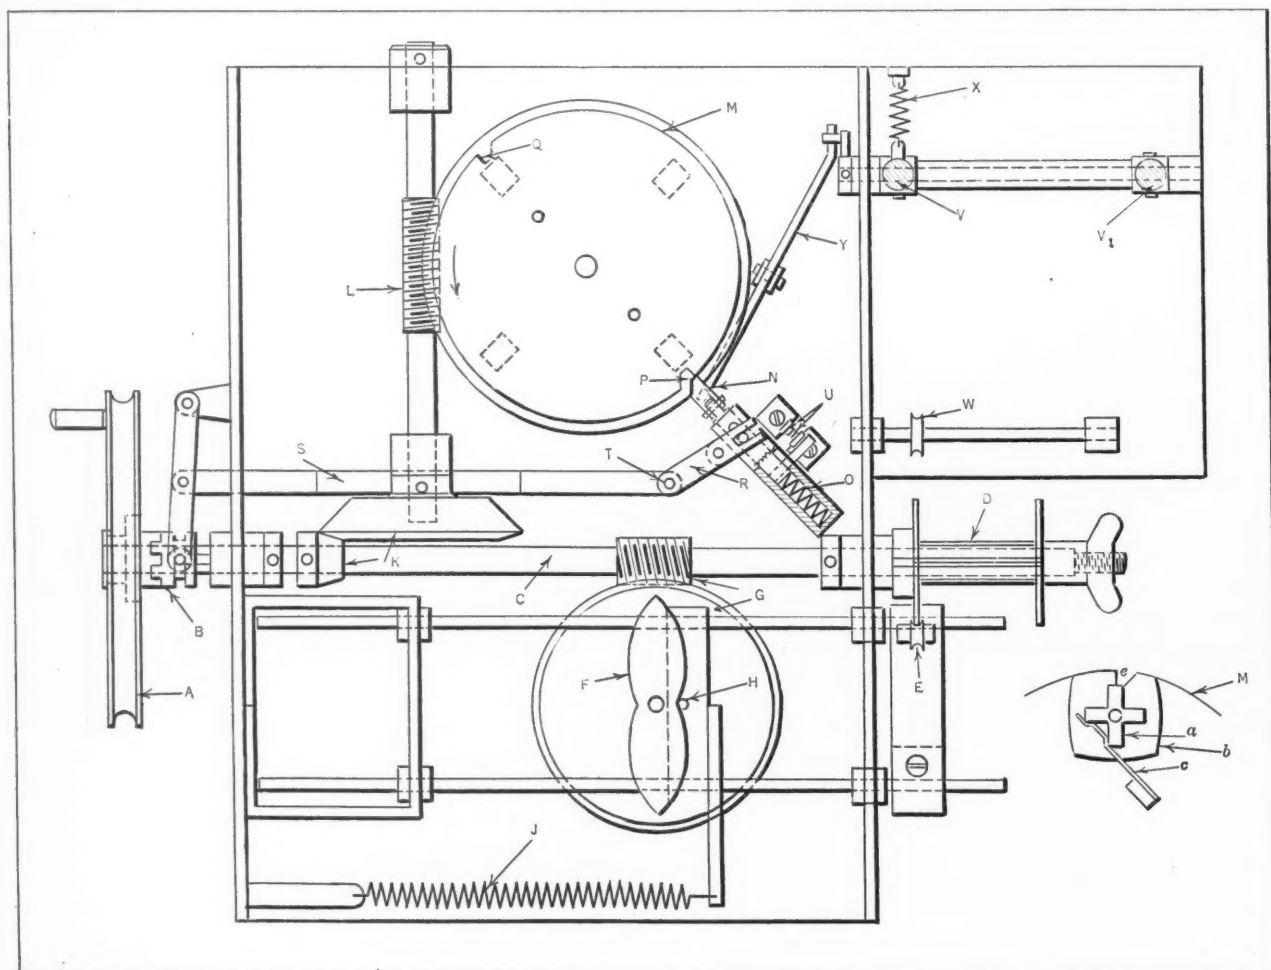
Coil-winding Machine which Stops Automatically (a) for Taps, (b) at End of Coil, (c) if Wire Should Break, and (d) when Wire Supply Spool is Empty
